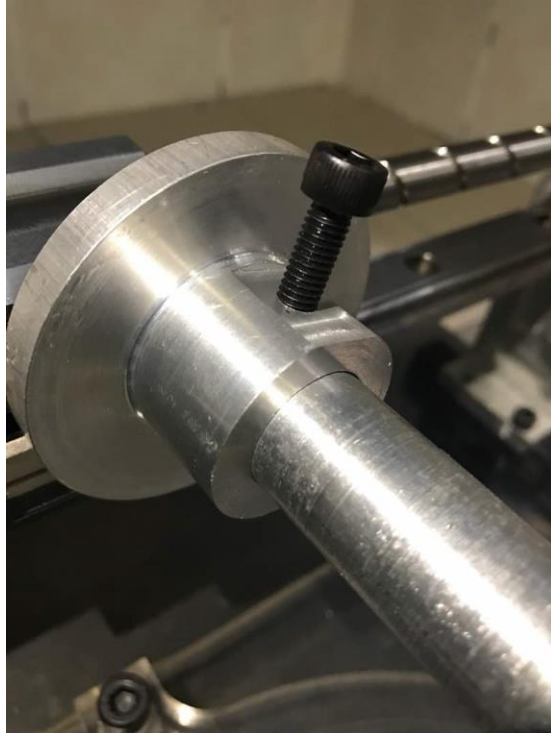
Scriber gripper assembly by using M6 Allen screw
